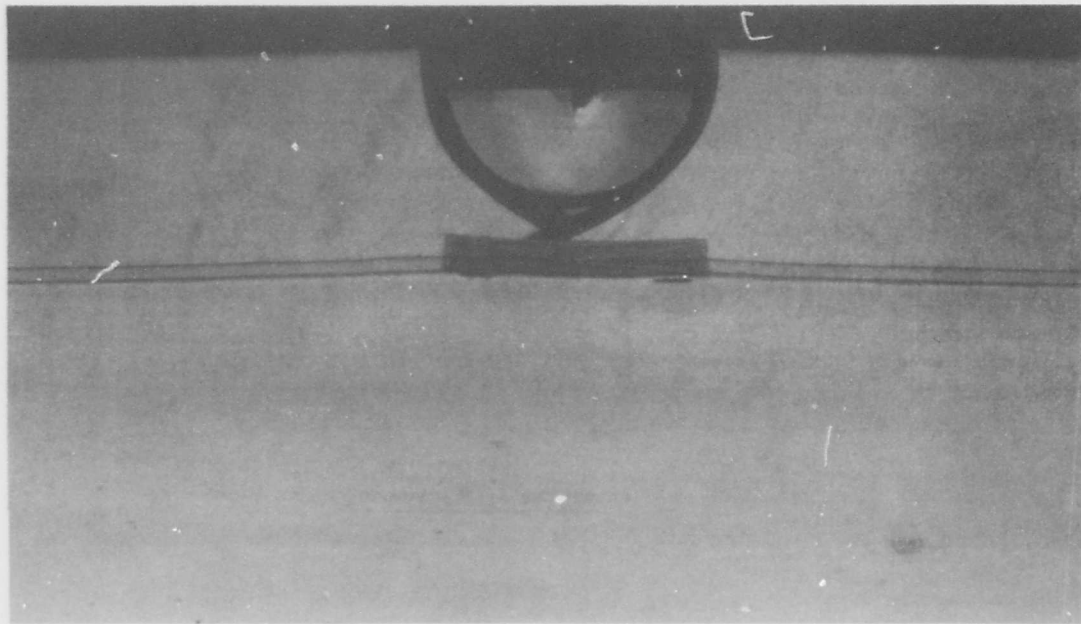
REDESIGNED CENTER CUTOUT (BOTTOM VIEW)
